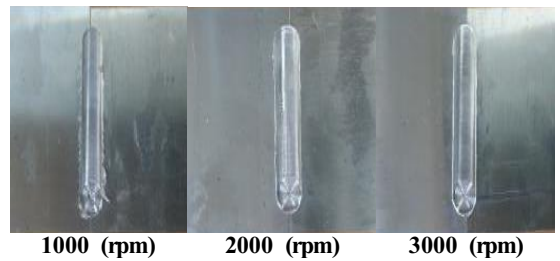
The welding parts for various rotation speed at 100 (m/min)
